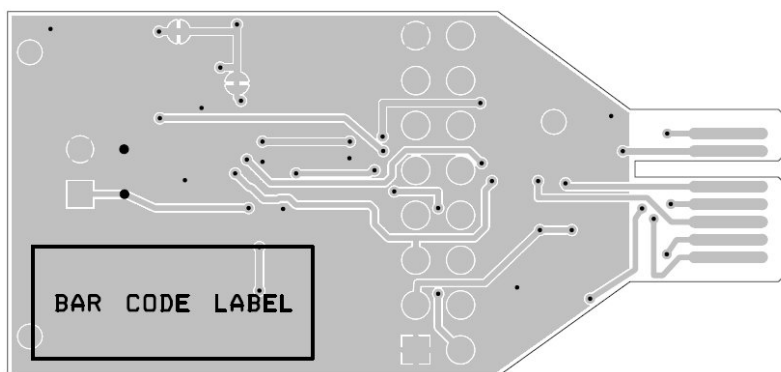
CBC-EVAL-12-34813 EnerChip RTC Board Assembly Diagram (Bottom View).
